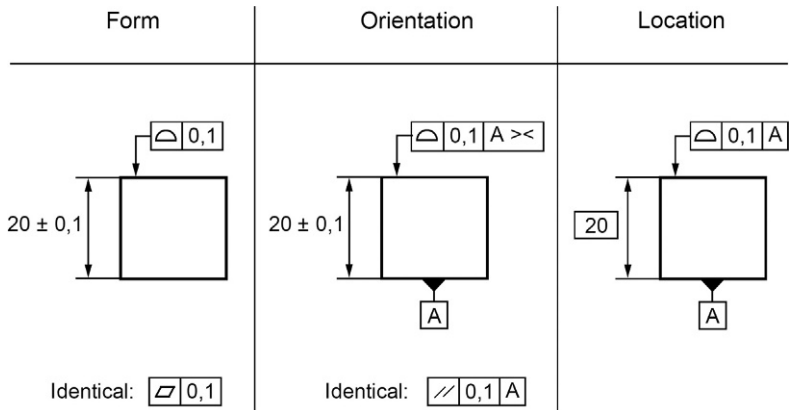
Profile tolerance of surfaces for tolerancing form, orientation and location
